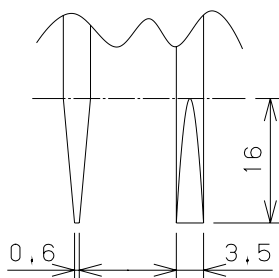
Recommended flat screwdriver edge drawing (unit: mm)
